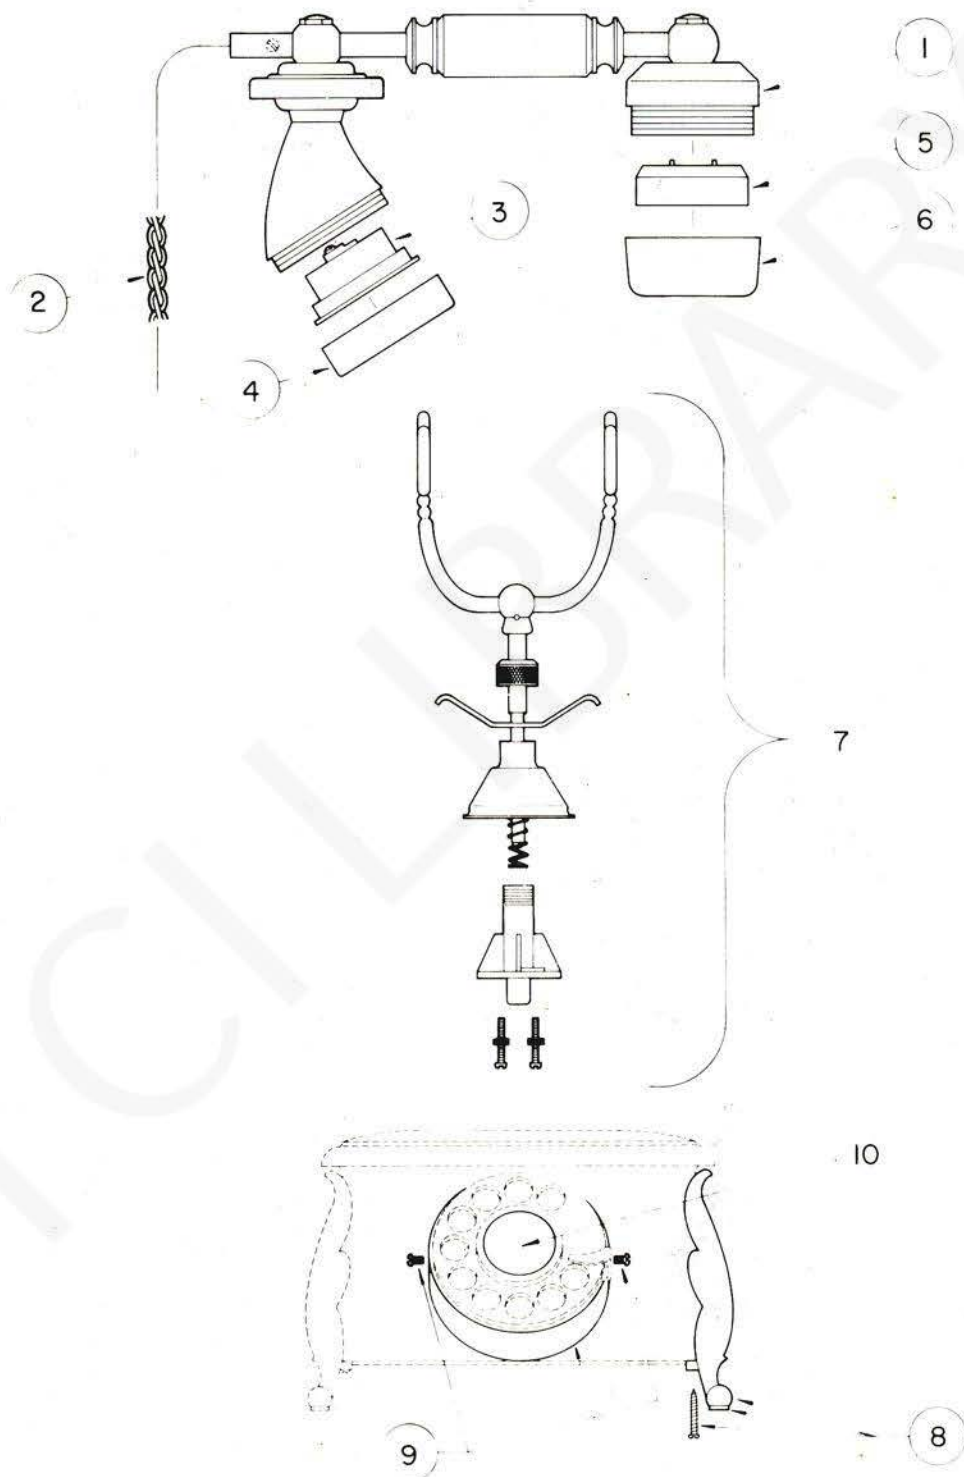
Exploded View of MD9149 Telephone Set (Classique)
